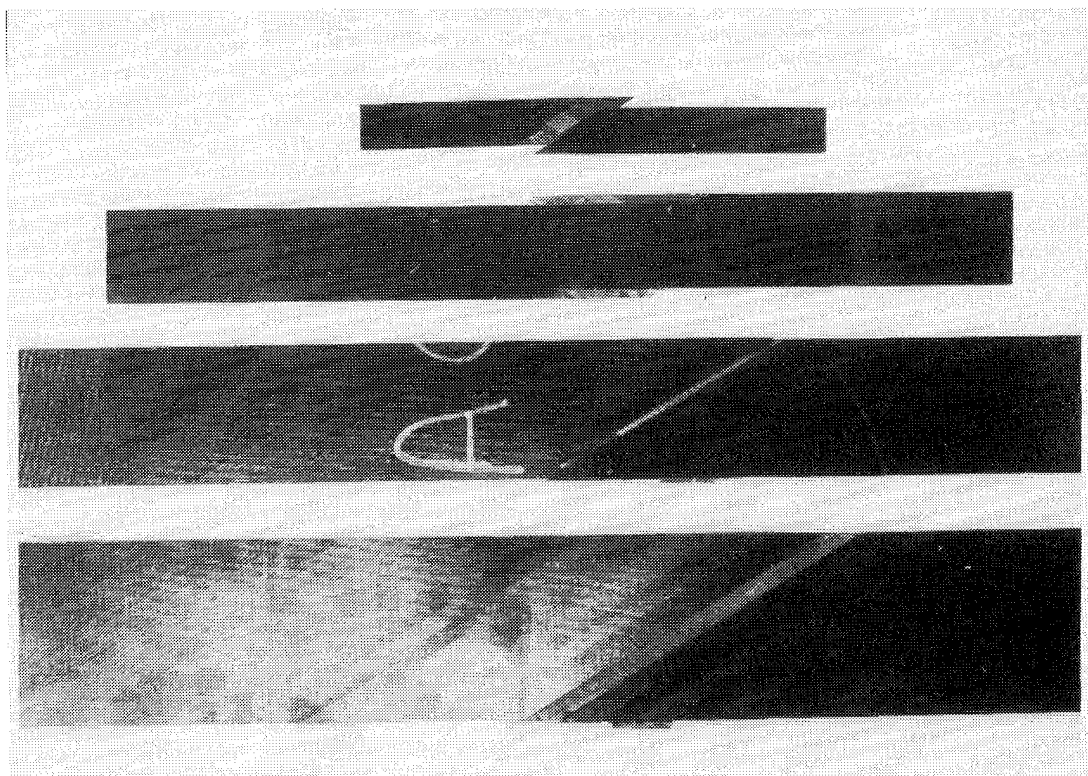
Typical failures in four scaled size specimens of Laminate A loaded in tension.
